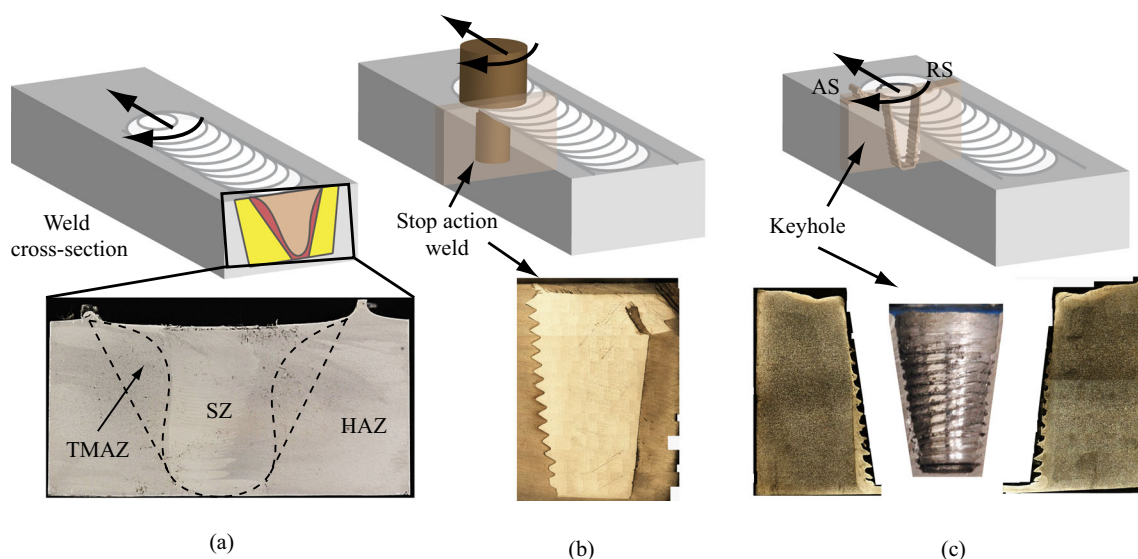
Optical macrographs of a weld cross-section, b “stop-action” weld, and c weld key-hole considered for the microstructural study in the present case
